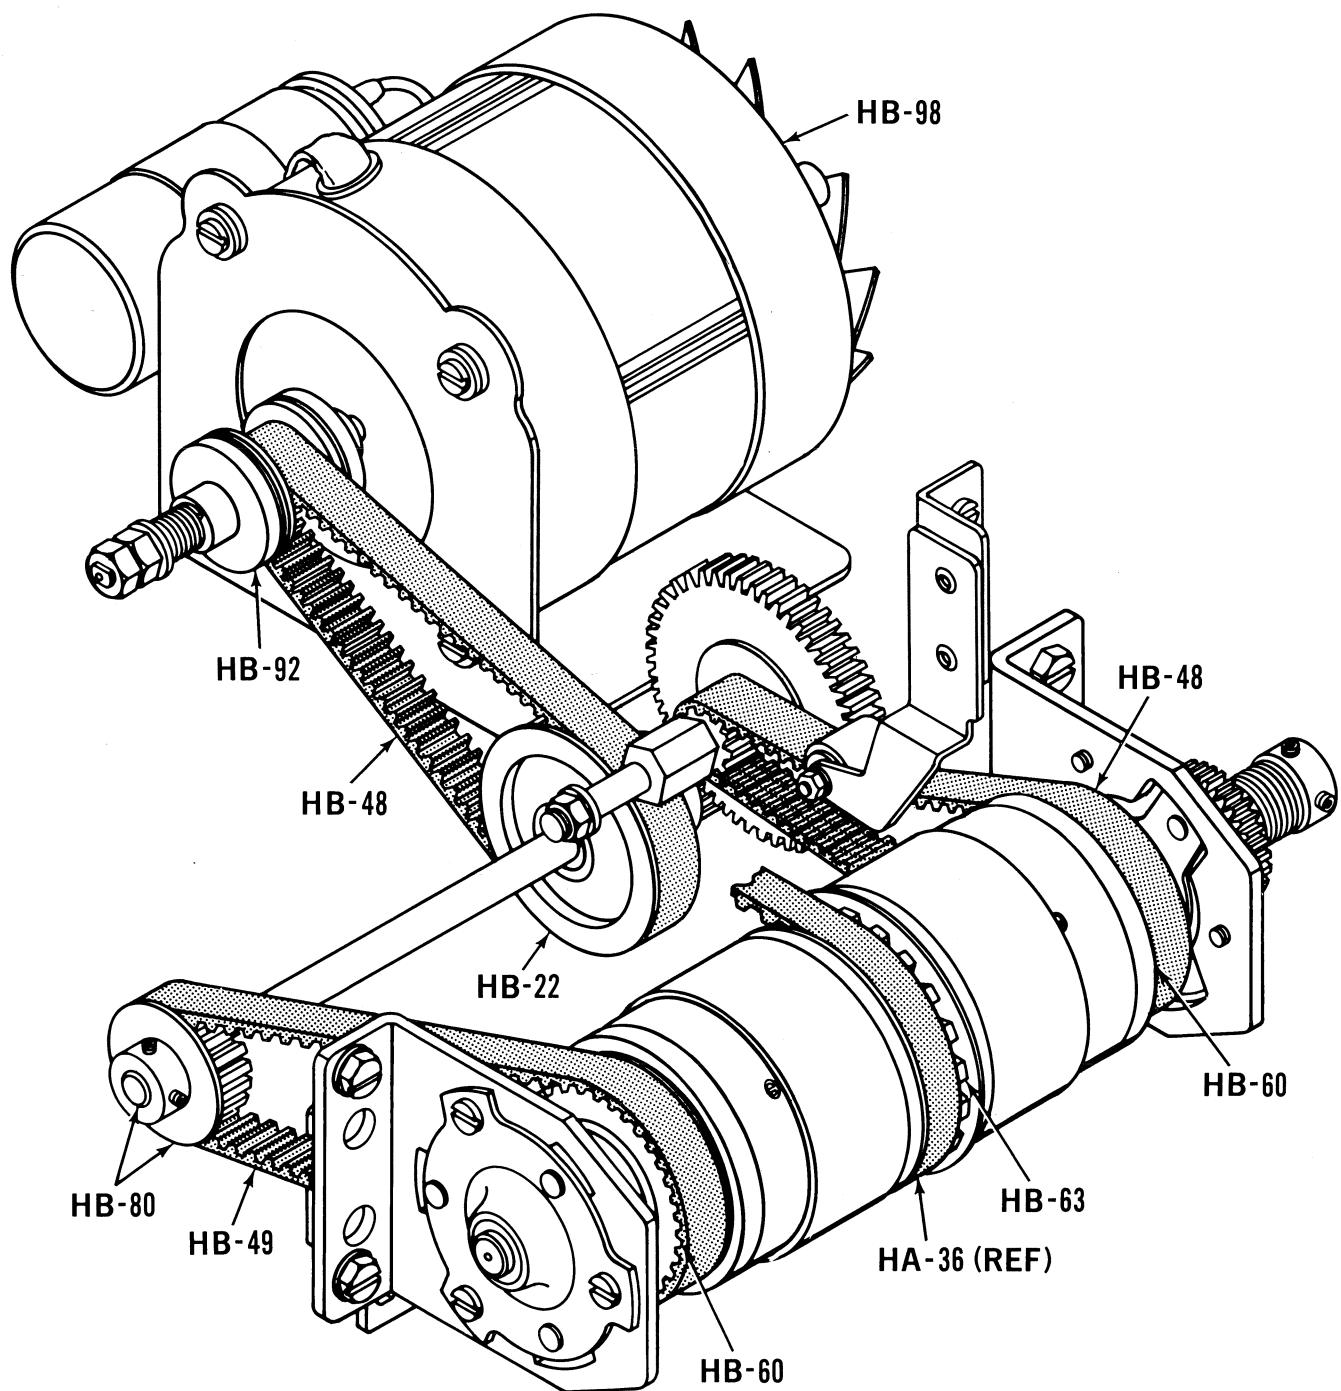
MAIN MOTOR DRIVE AND DRIVE BELT ARRANGEMENTS
